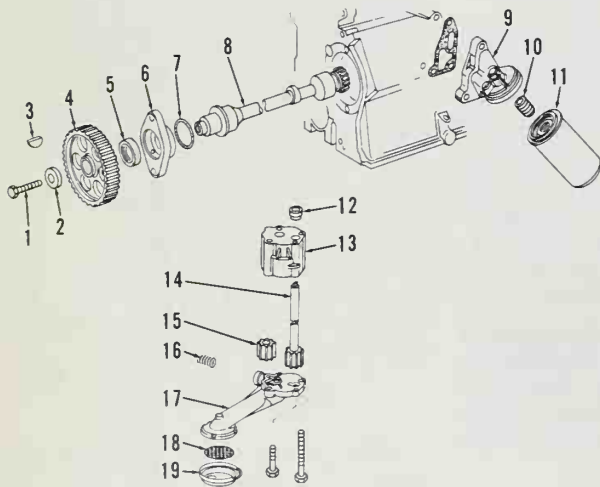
Exploded view of intermediate shaft and oil pump assemblies.
